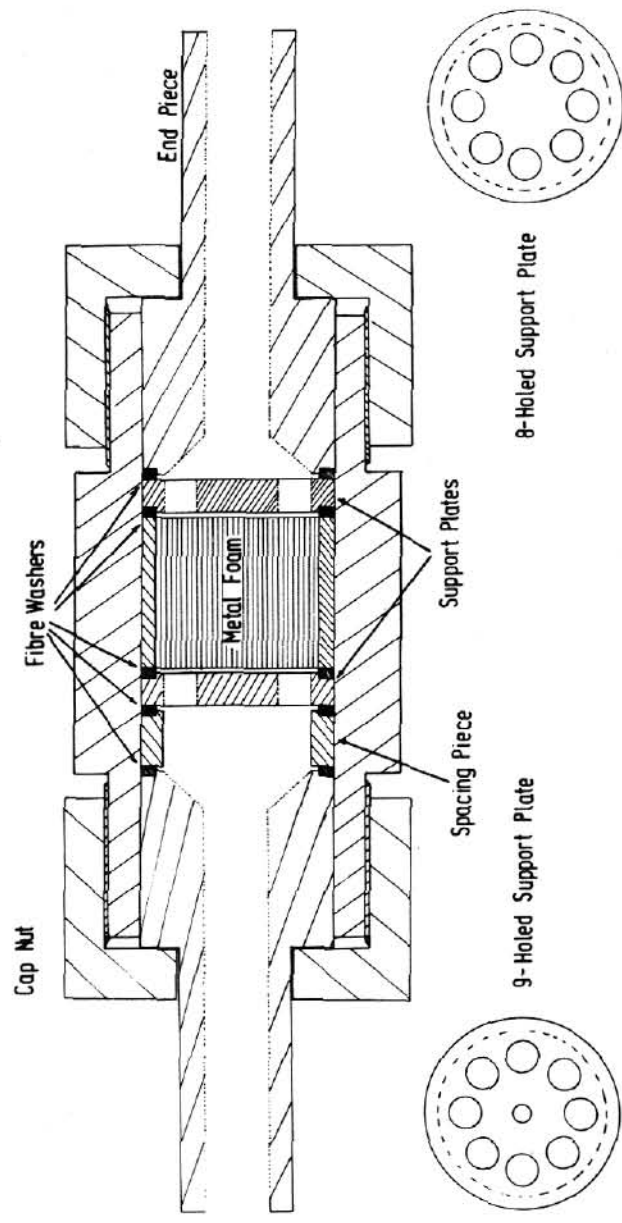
FLASH-BACK ARRESTOR ASSEMBLY
